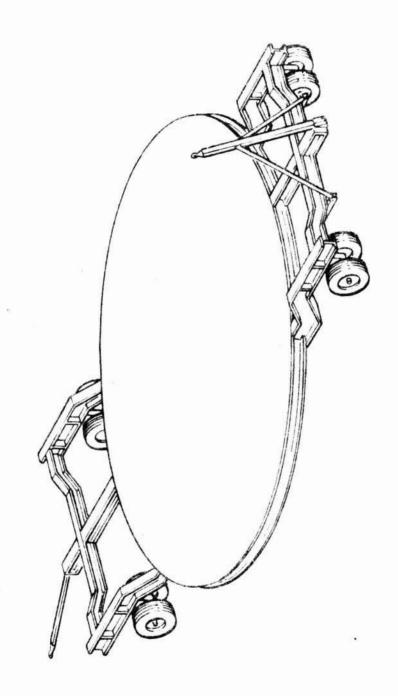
Lifting LH2 Cylinder Out of Assembly Fixture
